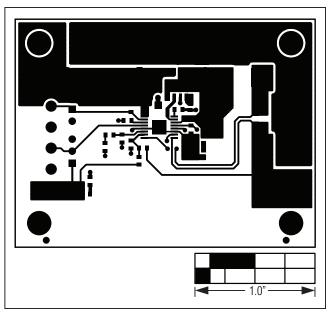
MAX16955 EV Kit PCB Layout—Component Side
